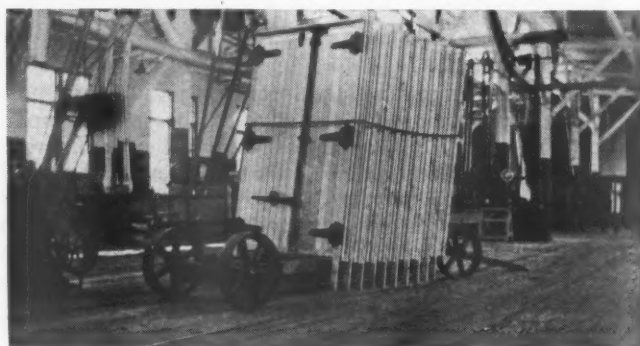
Trailer loaded with refrigerator car side doors and frames
